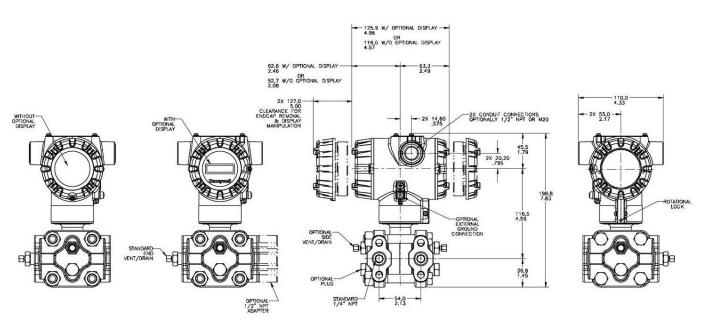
Typical mounting dimensions of STD810, STD820, STD830 & STD870 for reference
